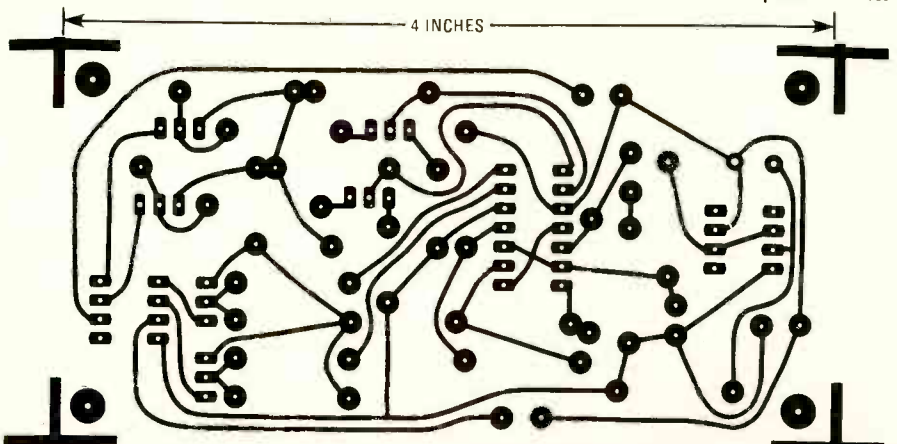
TWO-STAGE thermostat board foil pattern. Actual board is four inches wide.
